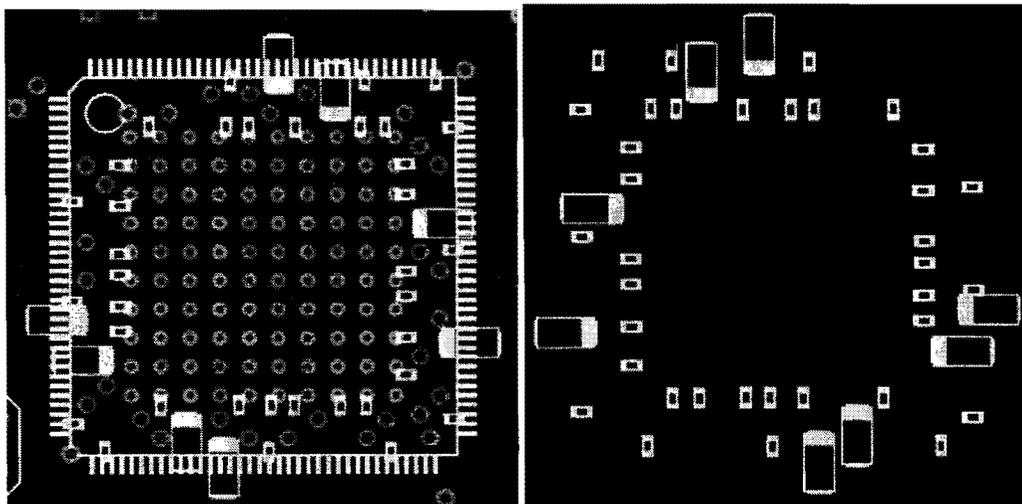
Layout of the PCB top and bottom, showing the thermal pads, ground power supply plane and underside mounted DSP decoupling capacitors
